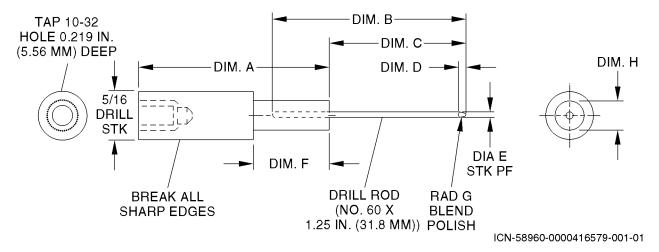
Contact Seating Inspection Kit Contact Adapter, T3009406-6
